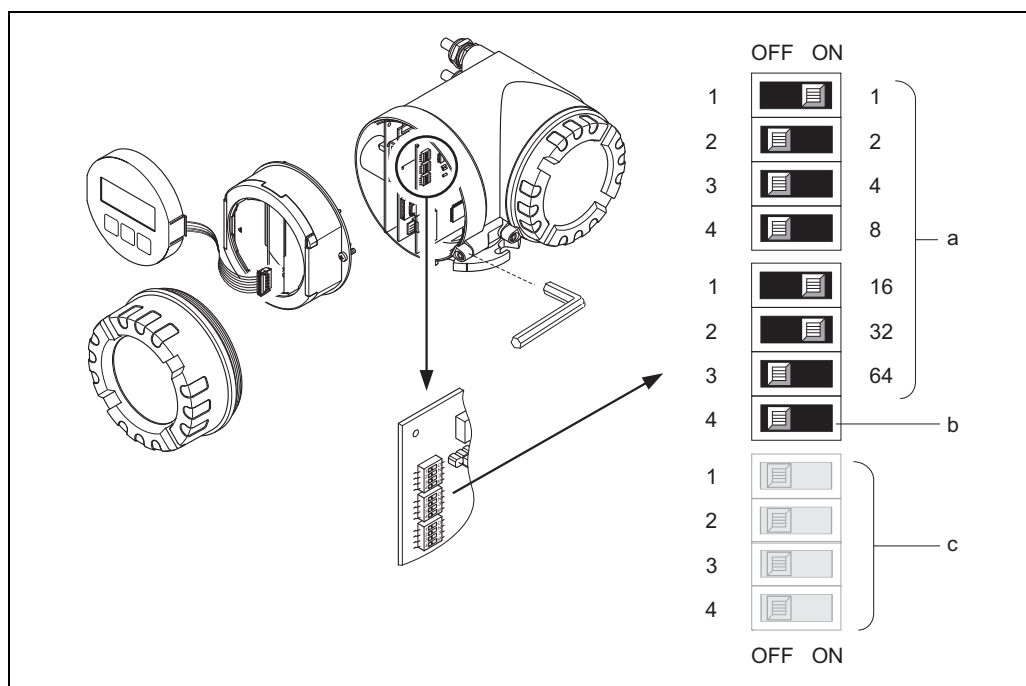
Addressing with the aid of miniature switches on the I/O board
